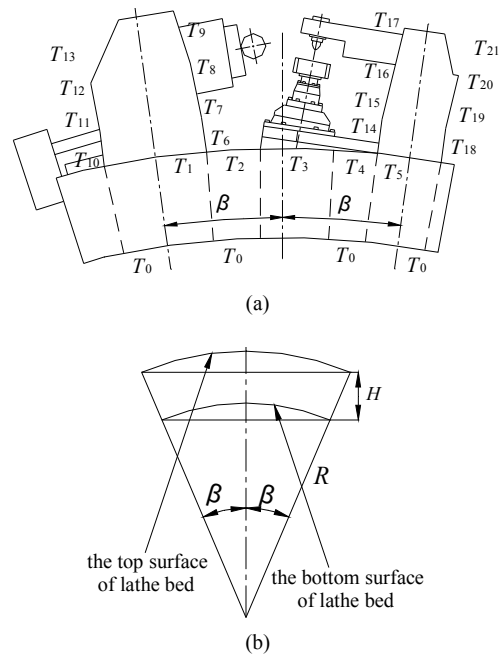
Thermal deformation of NC gear hobbing machine: (a) Temperature distribution; (b) Thermal deformation of lathe bed.
